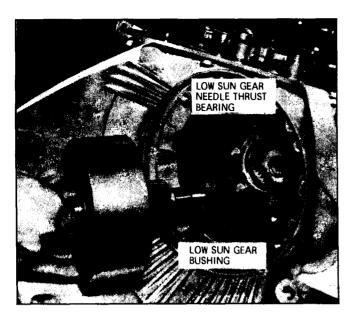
F-53 Removing Input Shaft and Clutch Assembly
